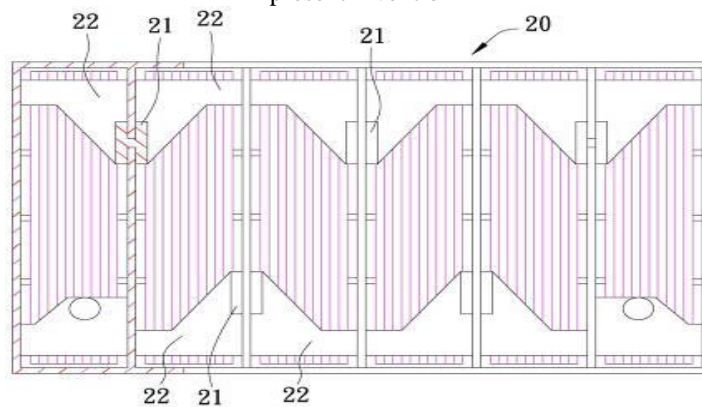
(b) a schematic view of the preferred embodiment of a device for inspecting a soldering spot in a storage battery
